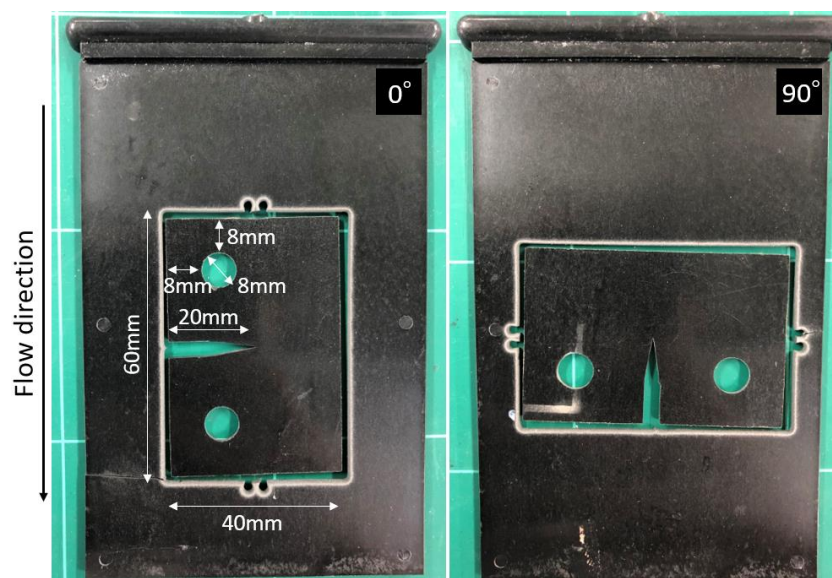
Photograph of CT specimens machined from injection-moulded plates.
